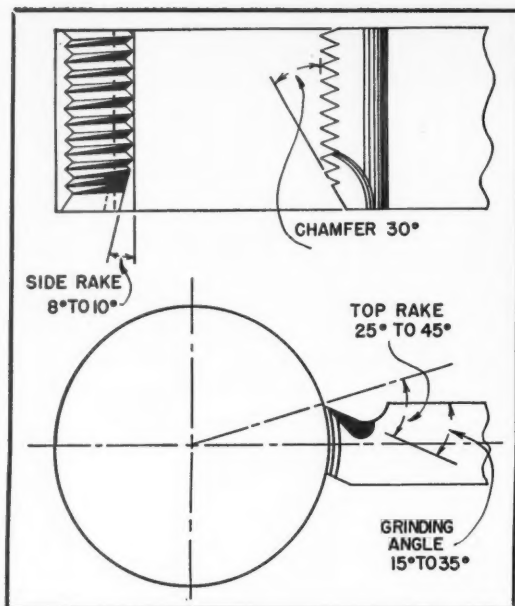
Illustration Showing Angles for Thread Chasers for Self-Opening Die Heads and Collapsible Taps
